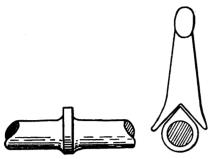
ALTERNATIVE METHOD OF FORGING AND WELDING.
